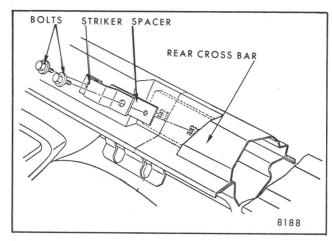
Back Door Striker Installation - "H-15" Styles
